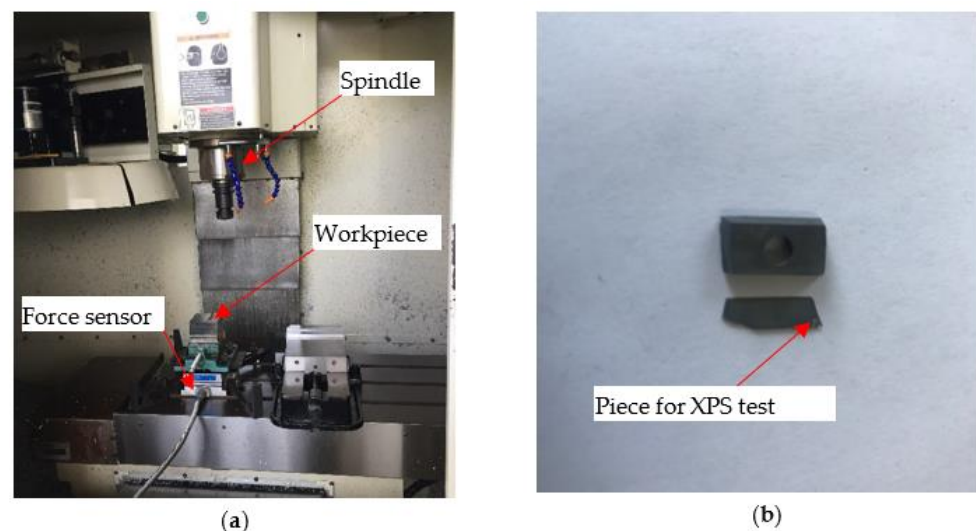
The milling test: (a) equipment used in the test; (b) tool being cut.
